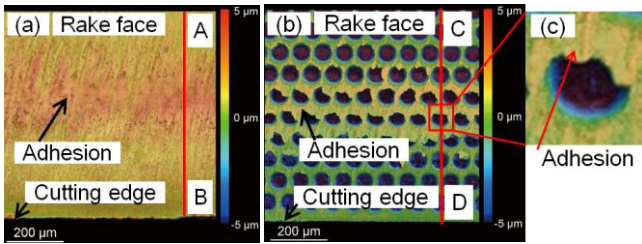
Tool rake face after cutting 1800 m, (a) non-textured tool, (b) DT06 and (c) magnified dimple of DT06
